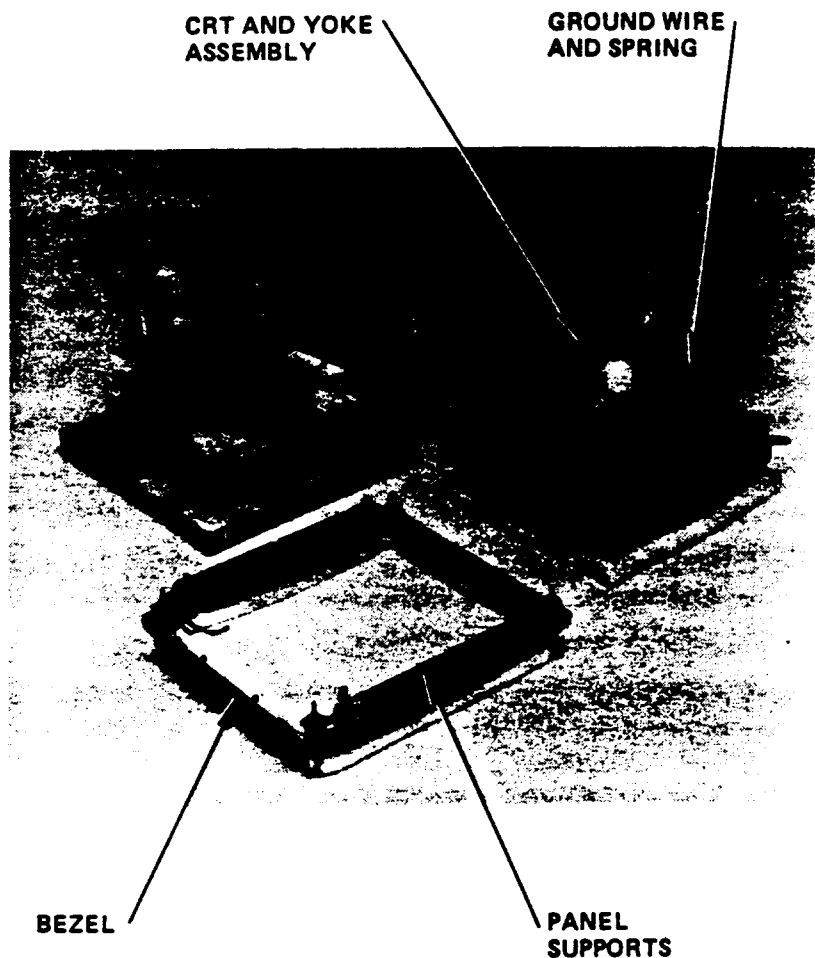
Removing the CRT and Yoke Assembly from the Bezel
